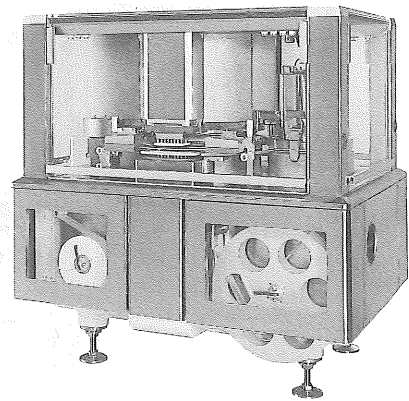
Appearance of Eisai Molding Tablet Machine (EMT150)
